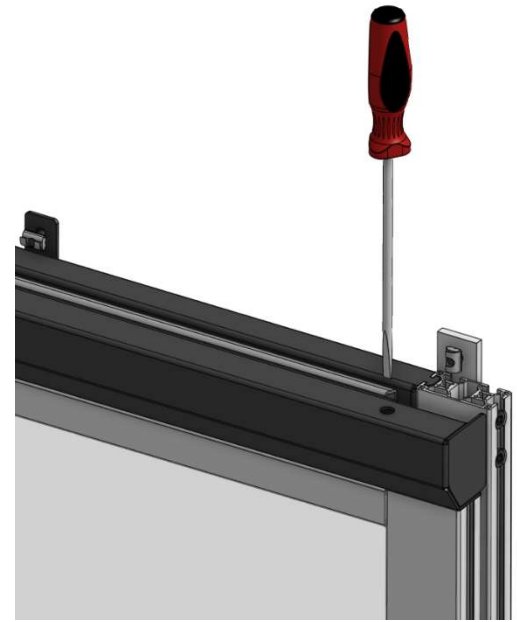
Access the auto-close damping adjustment screw through the hole in the top of the door panel top rail.
